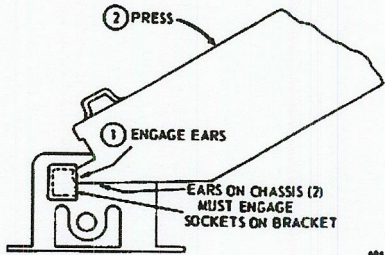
Installing chassis (bottom view with cabinet cut away).
